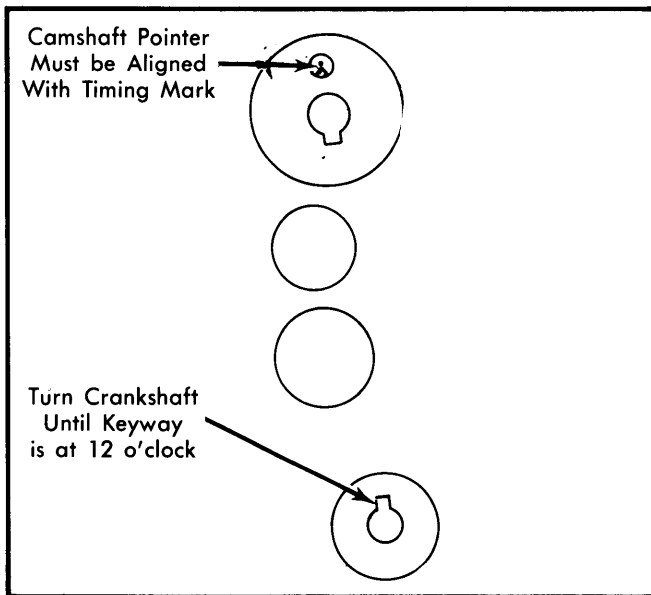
Position of Camshaft and Crankshaft for Valve Timing
